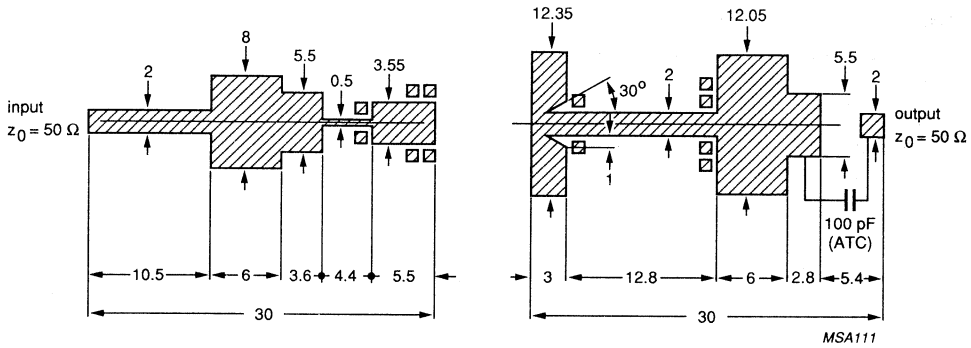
Prematching test circuit board for 4.2 GHz. (Dimensions in mm).
